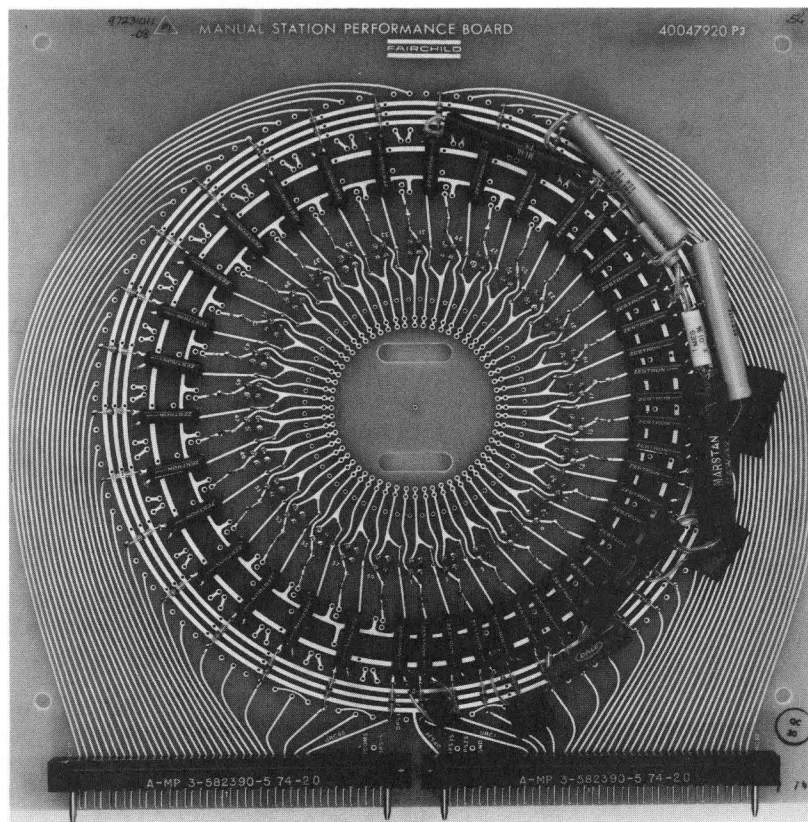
Solid Center Performance Board with Pin Patterns for Textool Sockets
